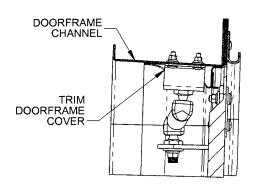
D4632-1/-2 STRIKER PLATE INSTALLATION
